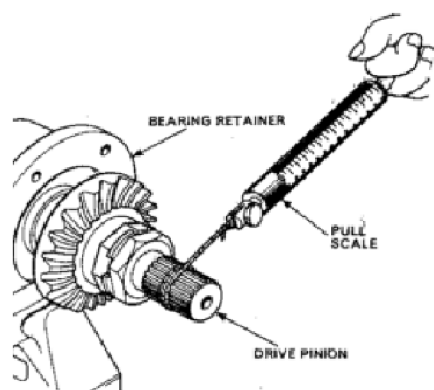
Checking bevel pinion bearing preload with pull scale and cord wrapped around pinion shaft.
